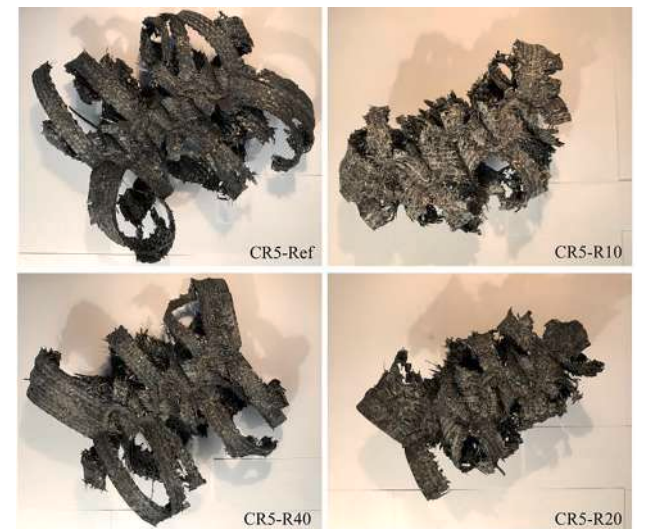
Top view of CR5 specimens after crushing (one specimen per material configuration is shown).
